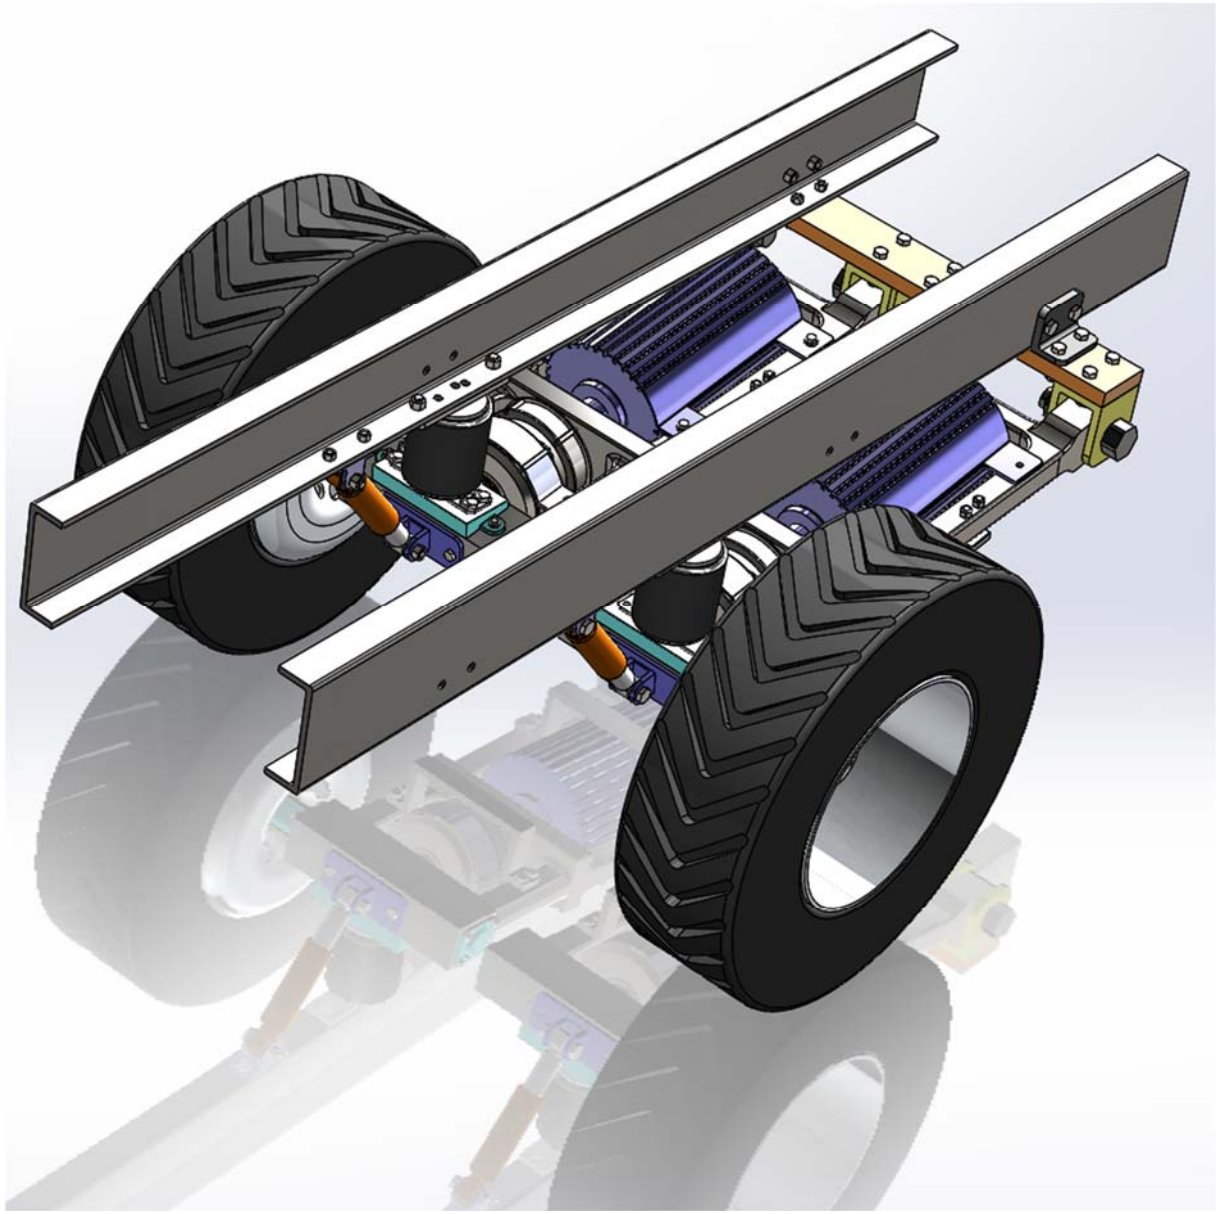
WHEEL SUSPENSION WITH ELECTRIC DRIVE 2
